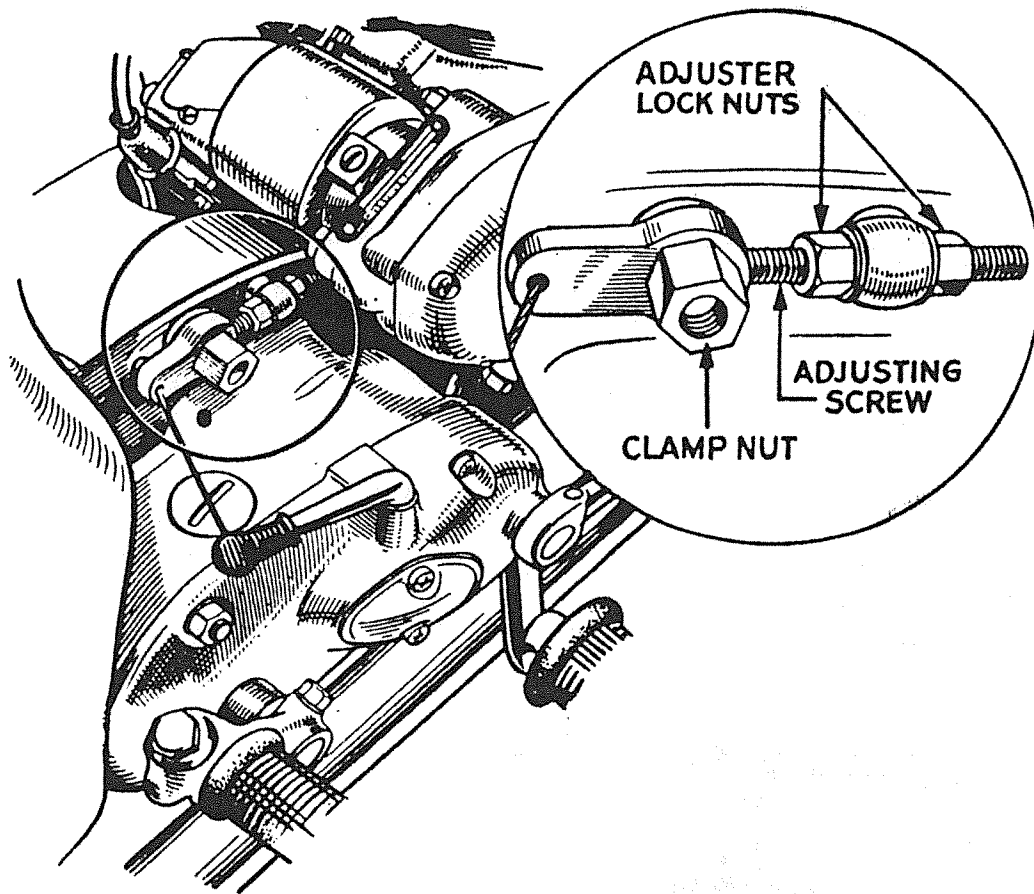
GEARBOX IN POSITION showing adjustment points.
